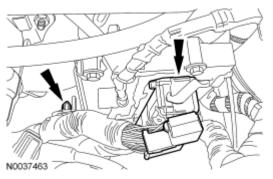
Locating Crankcase Vent Tube Courtesy of FORD MOTOR CO.
